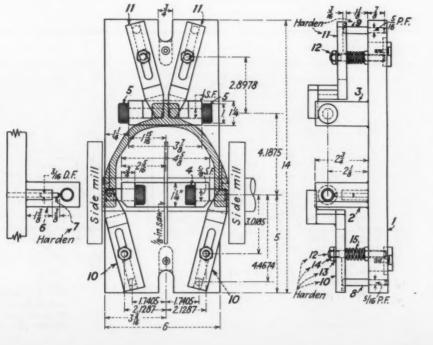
Following drilling, the double casting is side milled and cut into two parts in this milling fixture. Details of its construction and use are included in this article.
